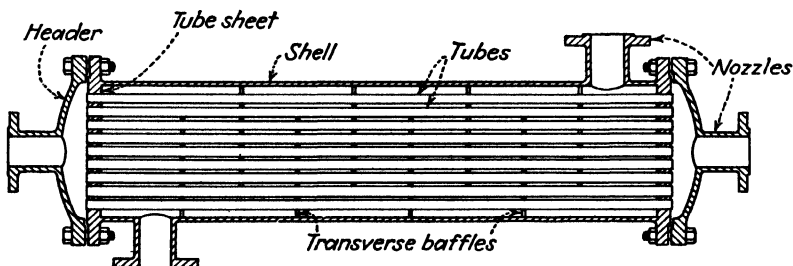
Cross section of a simple shell-and-tube heat exchanger.
